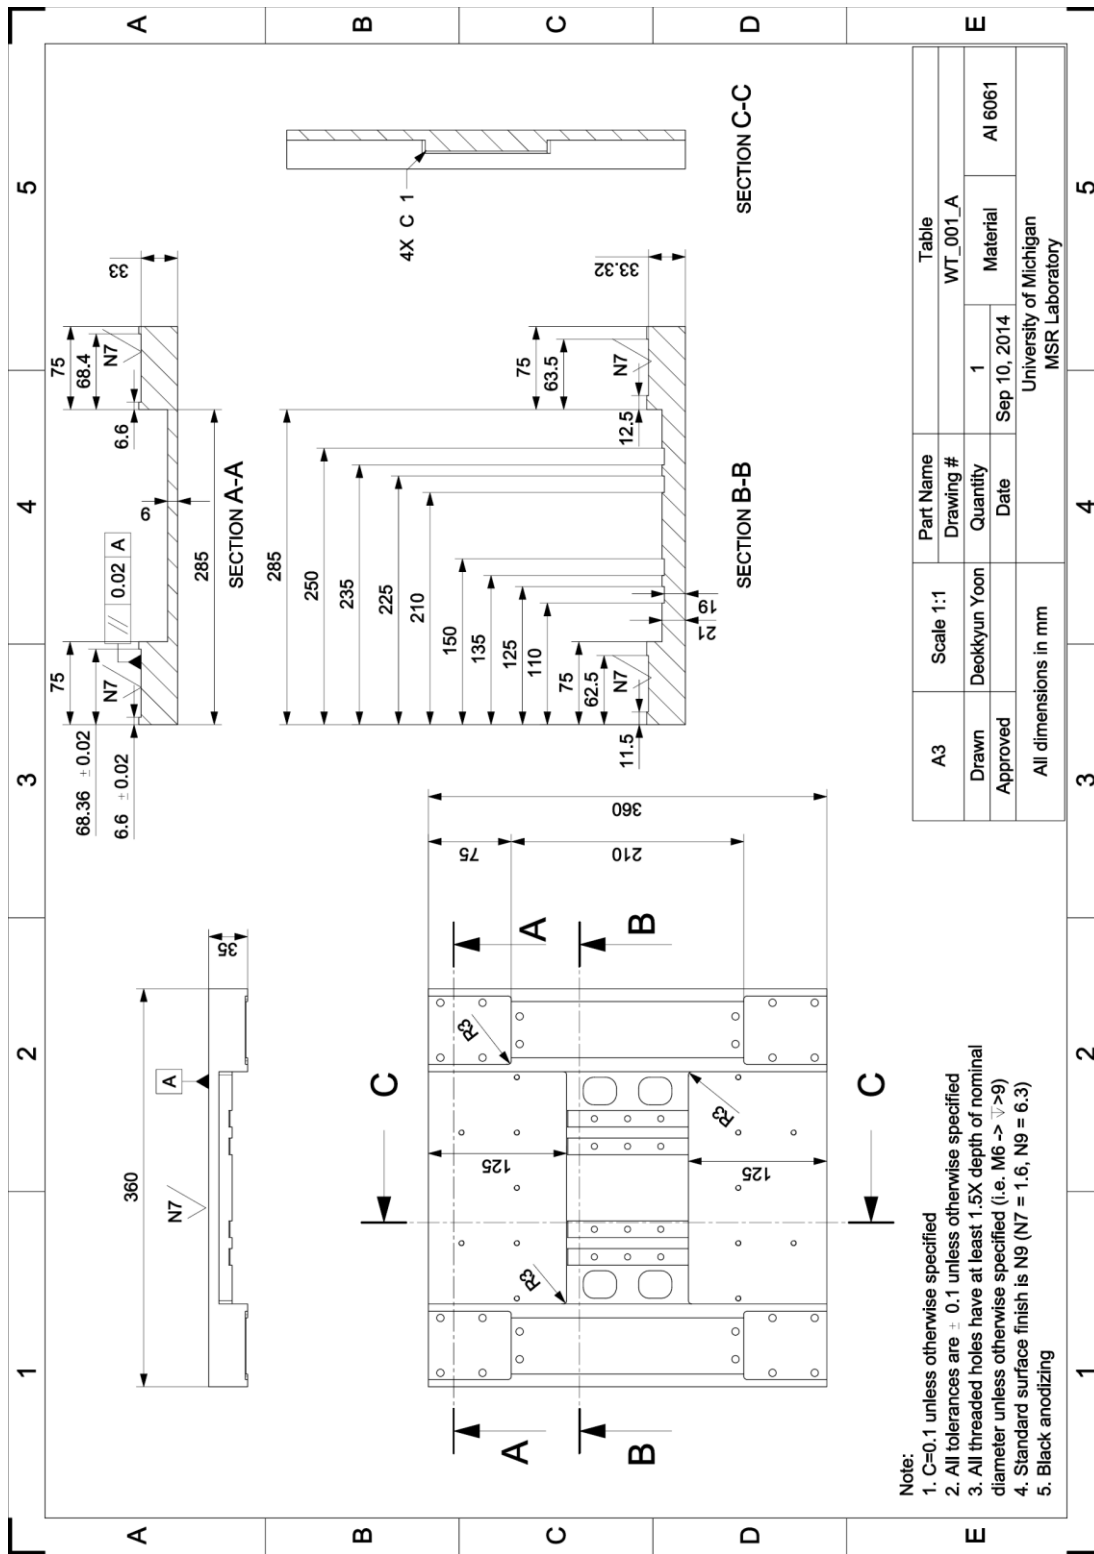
Manufacturing drawing of Table (pg. 1 of 3).
